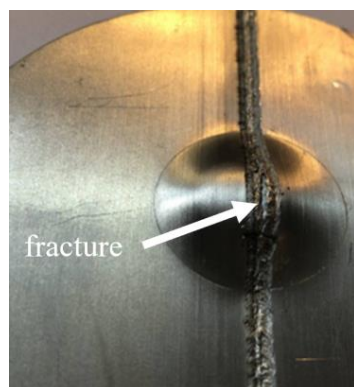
Example of fracture in the weld seam of an Erichsen cupping test specimen.
